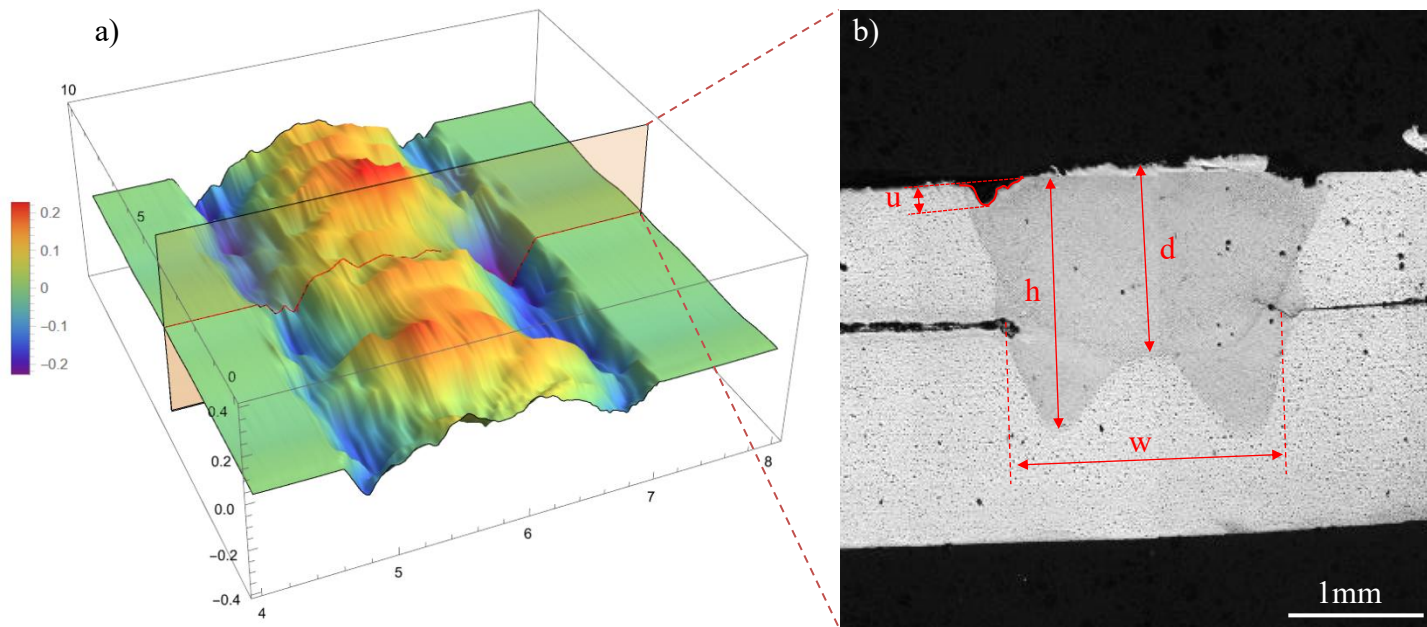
a) Scanning of weld surface by multi-axial form tracker machine and b) Optical microscopy of cross section of sample 9
